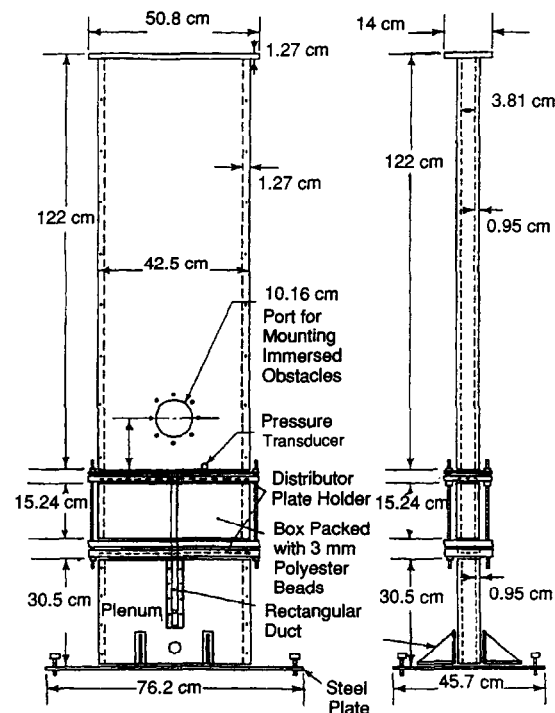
Assembly drawing of the UIUC two-dimensional atmospheric fluidized bed.
